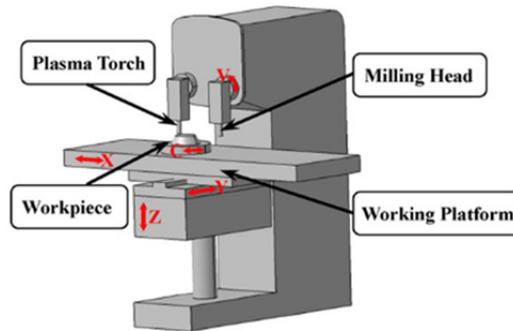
CNC machine with welding torch and additional tool for milling [22]
